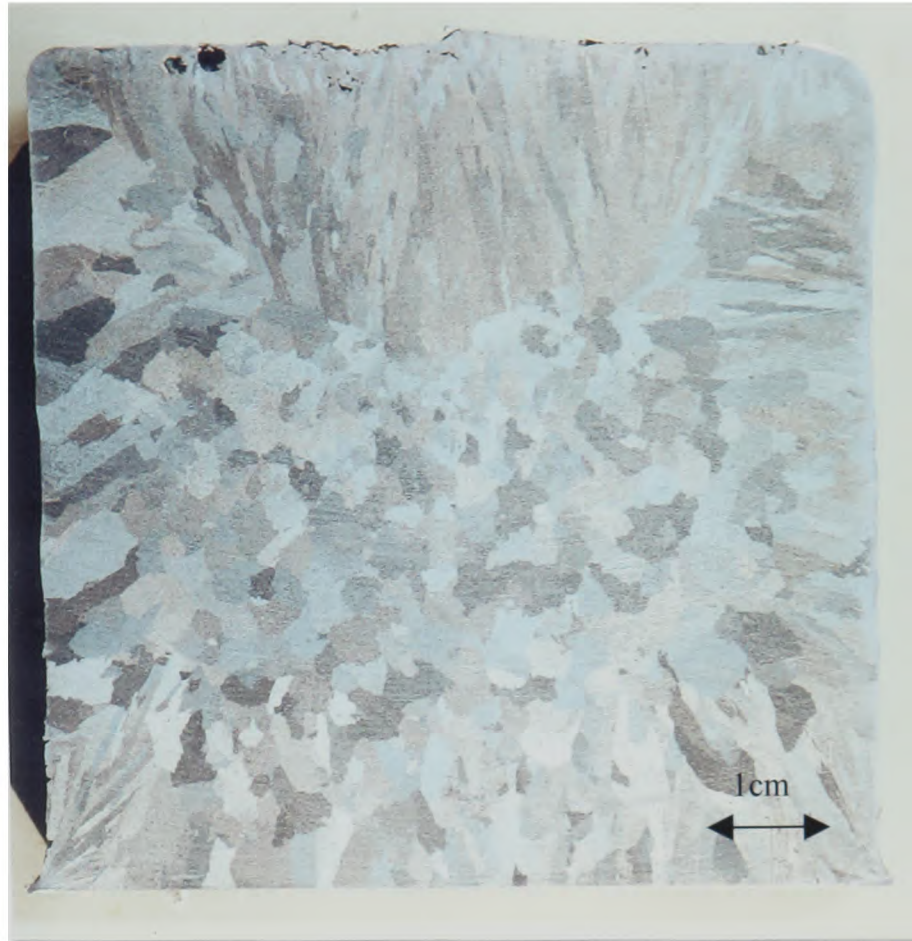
Macrostructure of Al-10wt.%Cu casting, 150°C superheat
